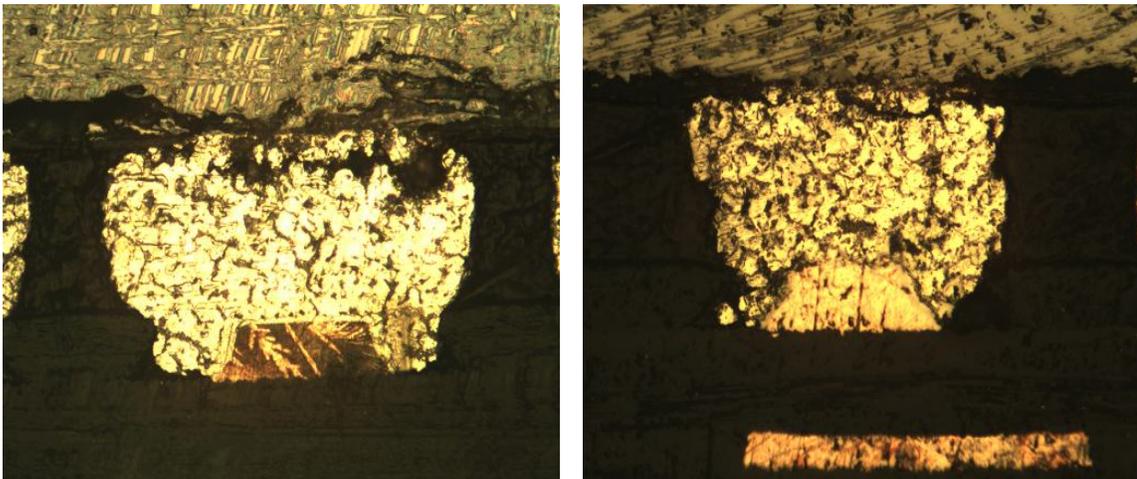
Hot Melt 2 CSP Solder Ball Failures, 1200 Cycles
